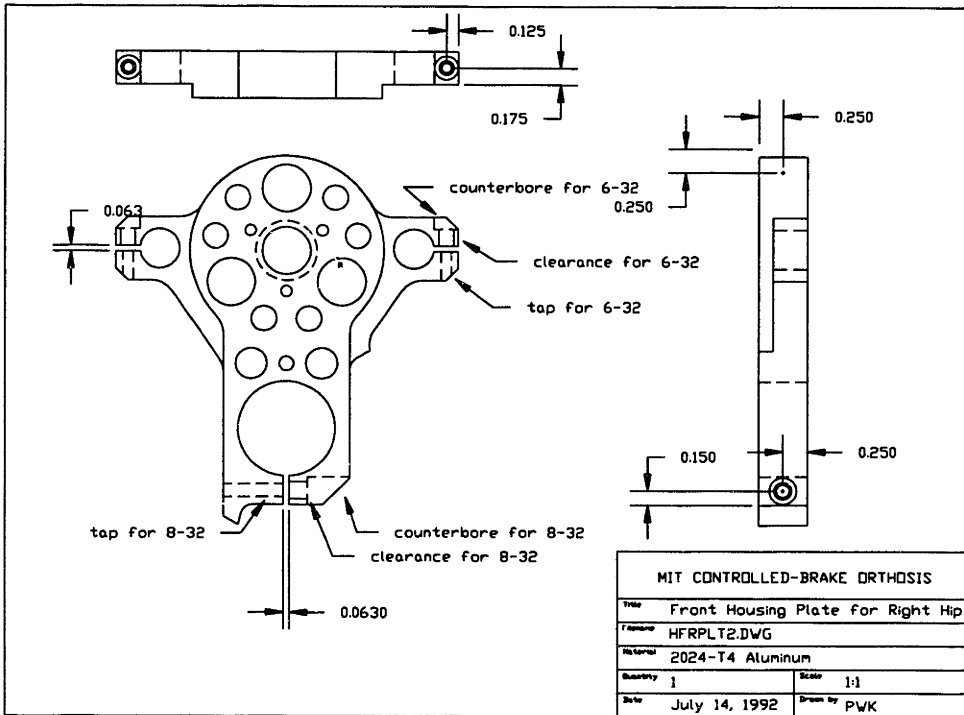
Front plate for right hip gear housing (drawing 2 of 2).
